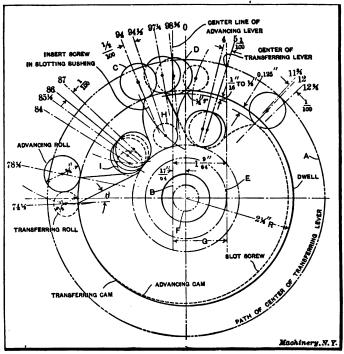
Illustration showing Method of laying out Transferring and Advancing Cams
